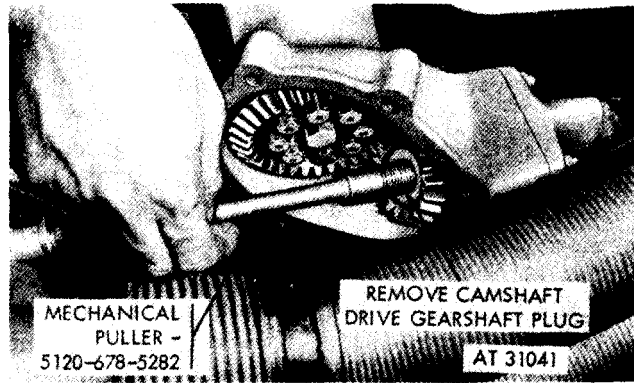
Removing or installing camshaft drive gearshaft plug using mechanical puller-5120-678-5282.
